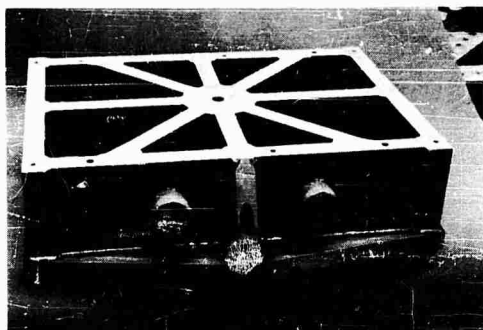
Dyna-Soar coupler electronics unit vertical vibration fixture
